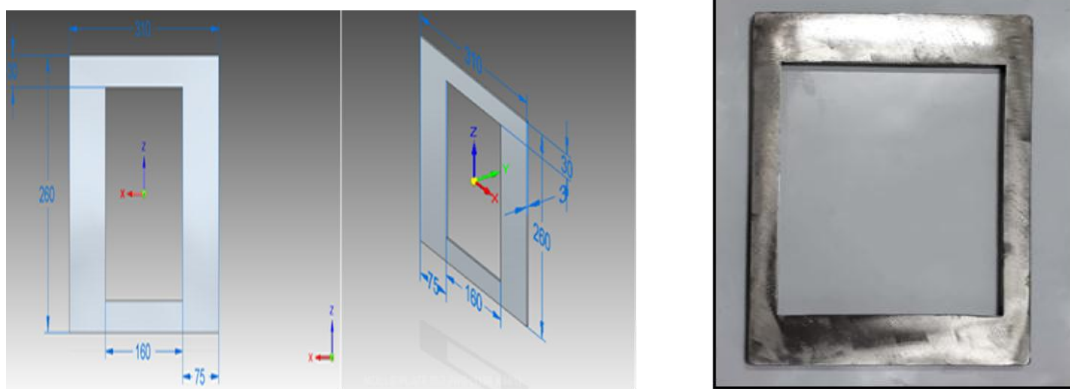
(a) Design of the plate and Figure 1(b) shows the Mould plate
